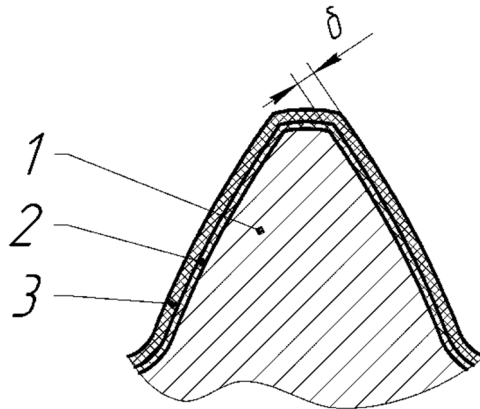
The scheme of applying a wear-resistant coating to a tooth tool: 1 - base - high-speed steel; 2 - adhesive layer; 3 - protective layer
